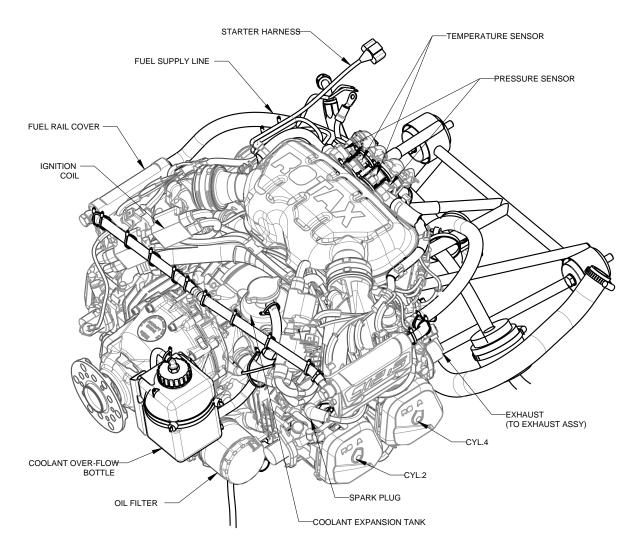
VIEW LOOKING DOWN, FWD, LHS (OIL TANK NOT SHOWN)
